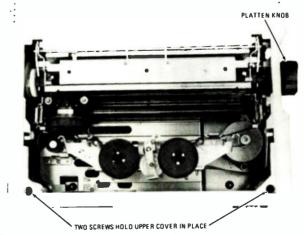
Detail view with call outs of the upper cover showing the two screws which must be removed as well as the platten knob.
